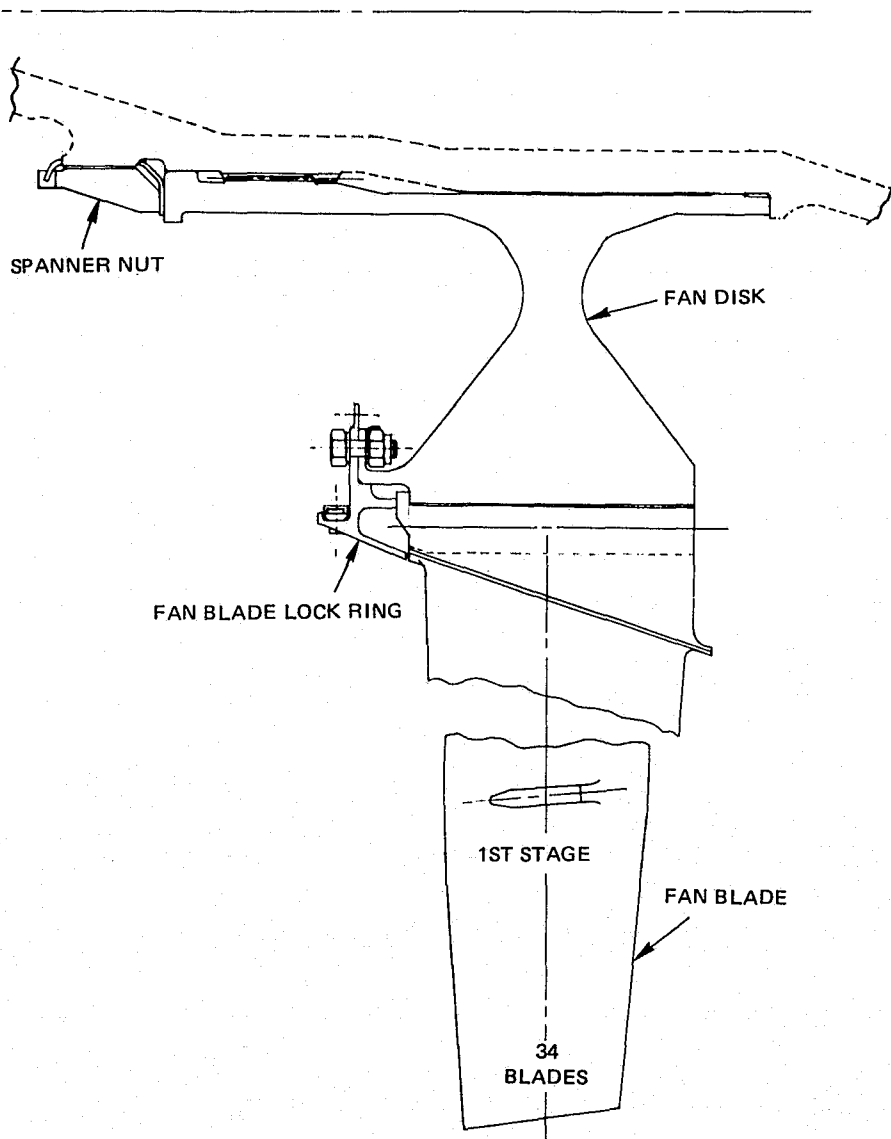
Final Design of JT8D-100 Fan Rotor Assembly
